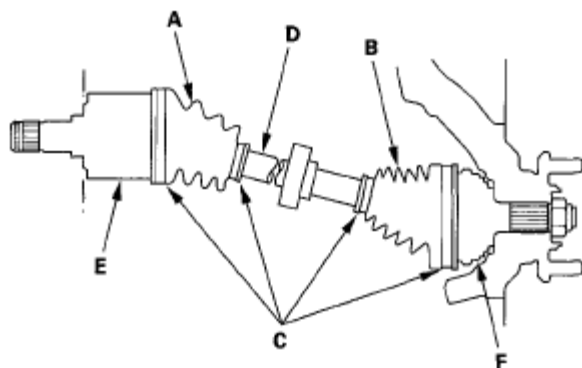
Checking Inboard Boot And Outboard Boot For Cracks, Damage, Leaking Grease
